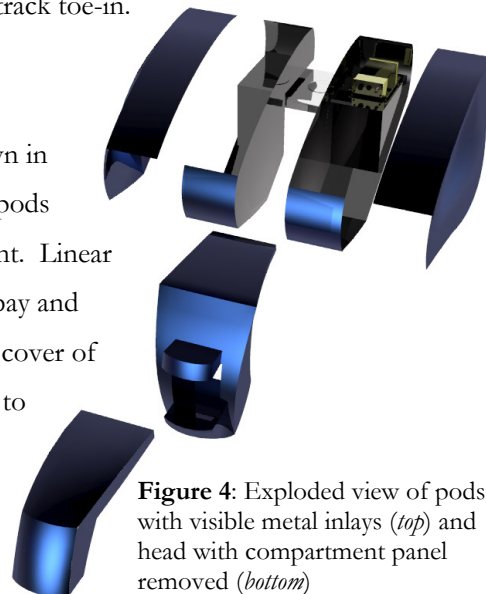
Exploded view of pods with visible metal inlays (*top*) and head with compartment panel removed (*bottom*)
